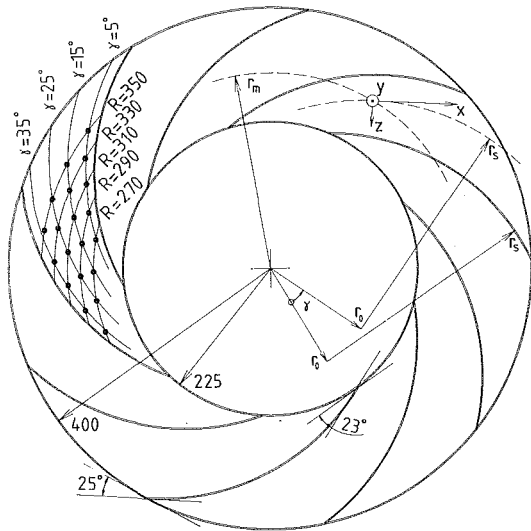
Test impeller with measuring positions and the reference coordinate system
